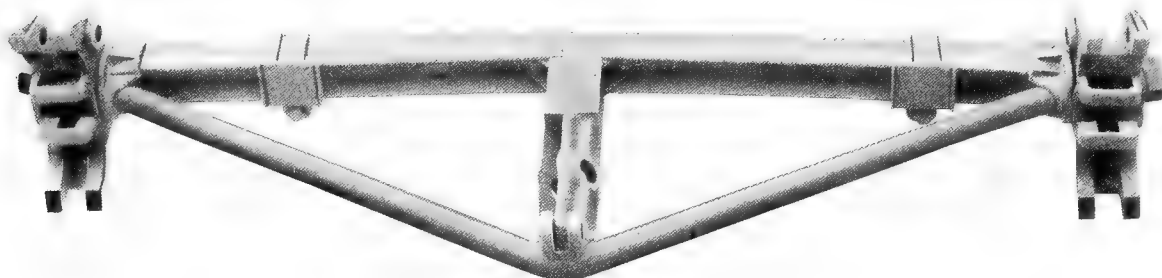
Hercules Adjustable Head Brake Beam for Four-Wheel High Speed Passenger Service.
